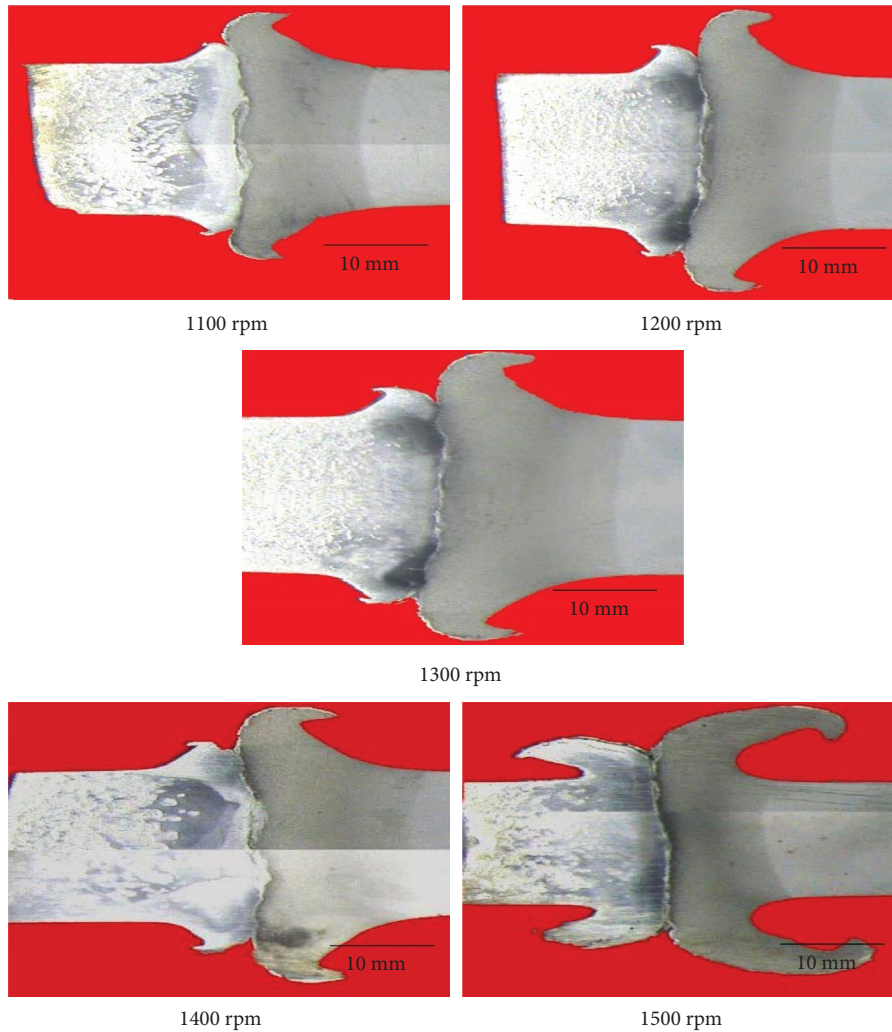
Macrostructure of dissimilar friction welded joints.
